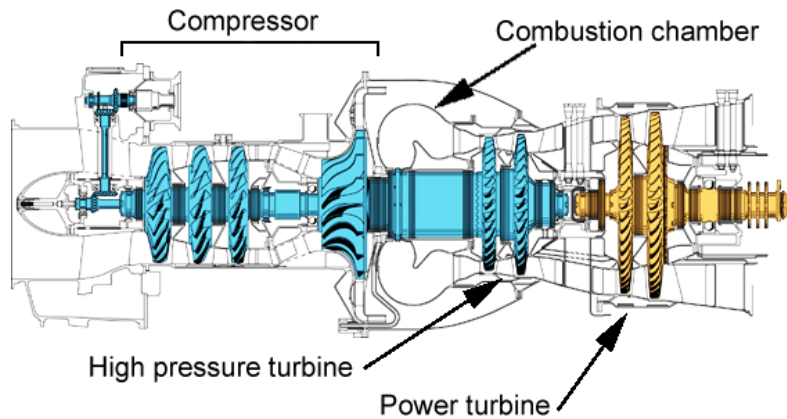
Schematic design of a turboshaft motor, after (MAZIÈRE, 2007): the combustion gas flows out of the combustion chamber in the high pressure turbine, which is part of the first shaft and drives the compressor. The power turbine stage of the second shaft transforms the remaining stream energy into mechanical energy. This shaft also ensures the connection to the gearbox.
